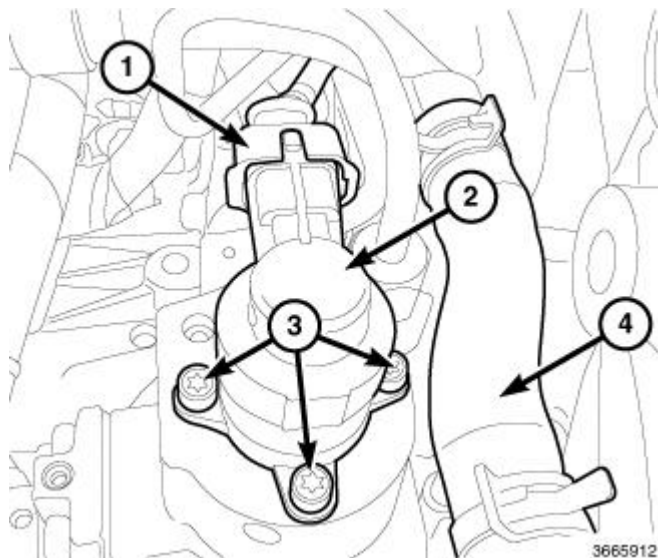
Fuel Quantity Solenoid, Connector, Bolts & Engine Coolant Hose
